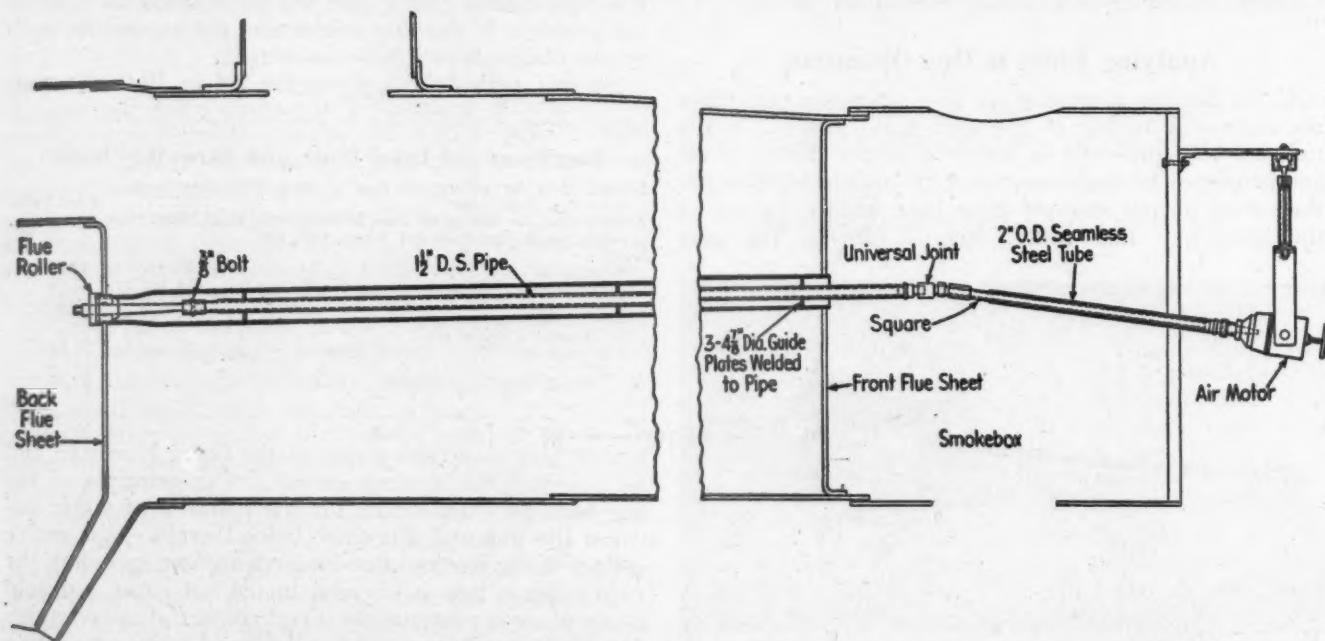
Arrangement for driving three-way flue roller in a fire box tube sheet by a motor suspended from the smokebox
